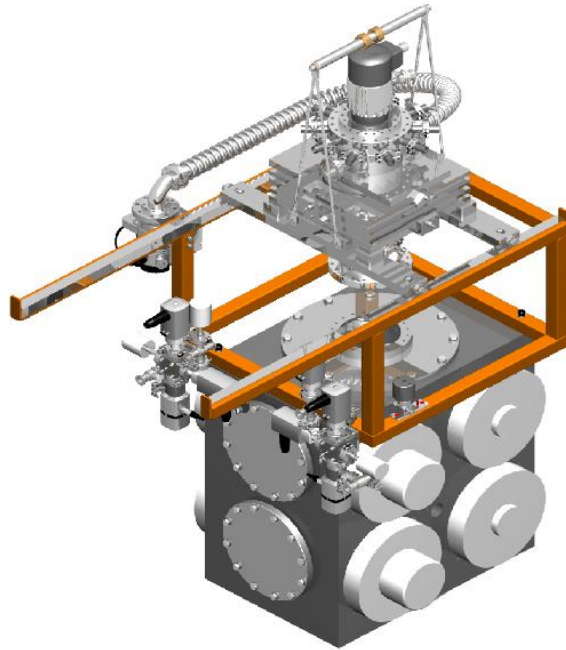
Technical drawing of the assembled pellet formation unit with cold-head and coordinate table lifted onto an assembly frame above its operational position on the pumping block. If rolled to the left position an exchange of capillary and nozzle is easily possible, while lowered only the cameras and light-sources have to be mounted to start operation.
